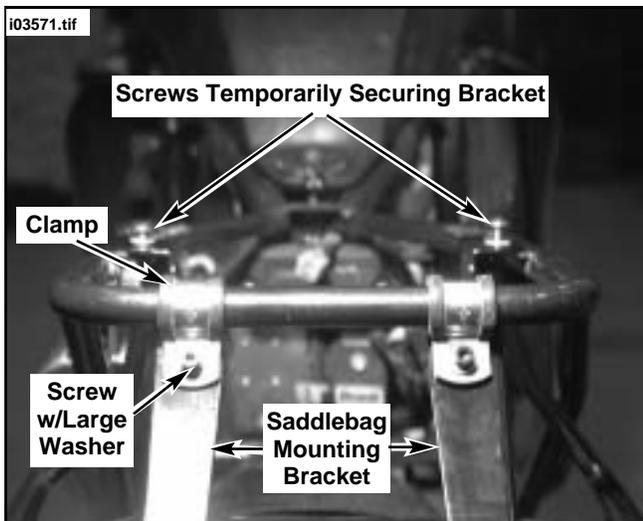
Install Clamps To Secure Mounting Bracket to Frame (Rear View)
